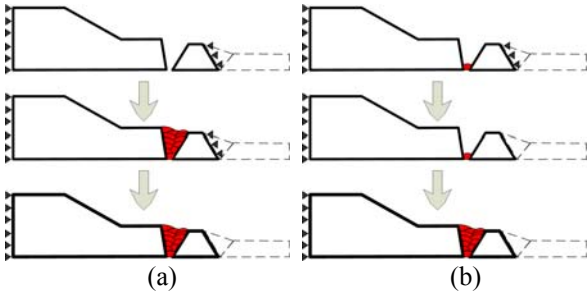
Idealized boundary condition for (a) shop weld and (b) tack weld
